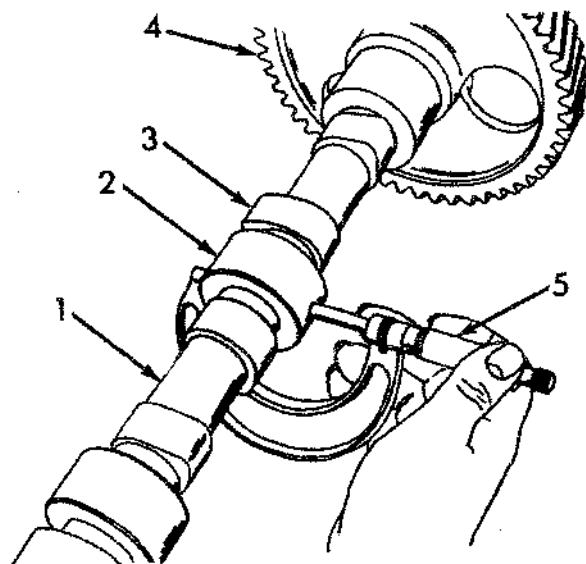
Checking Camshaft Bearing Journal (T-51648)
